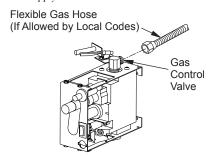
Attaching Flexible Gas Hose to Gas Control Valve
